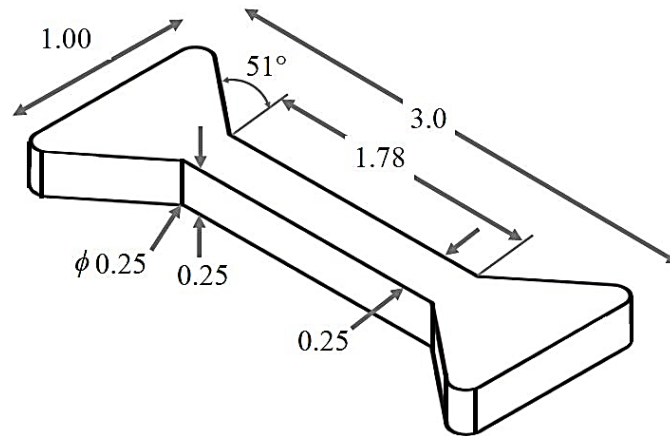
Microsample geometry and dimensions (all units in mm) (Nimer 2016).
